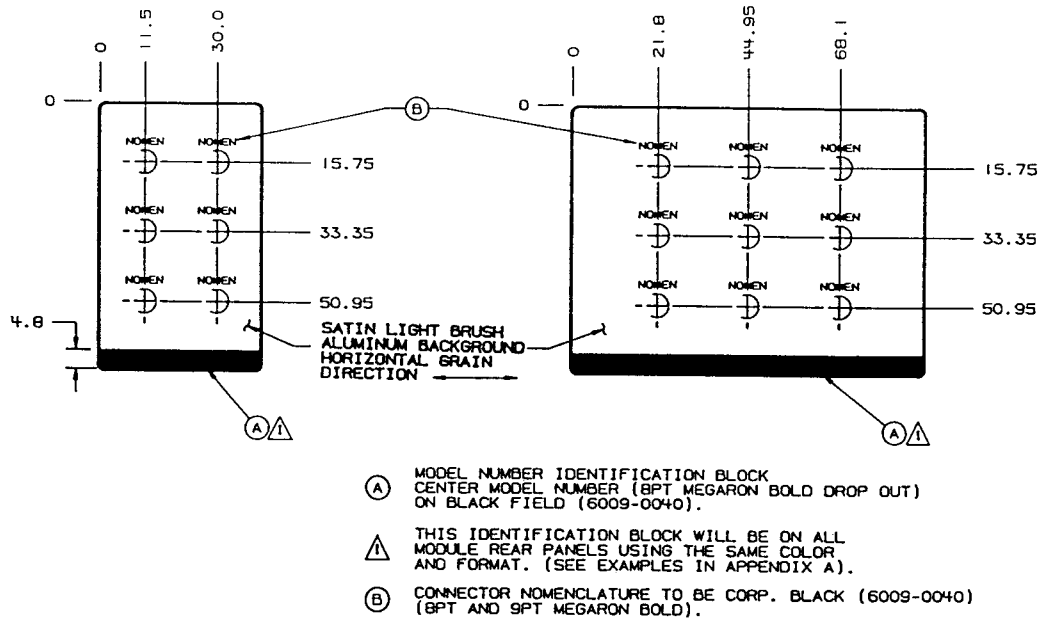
Rear Panel Typeface Sizes and Graphics Dimensions
